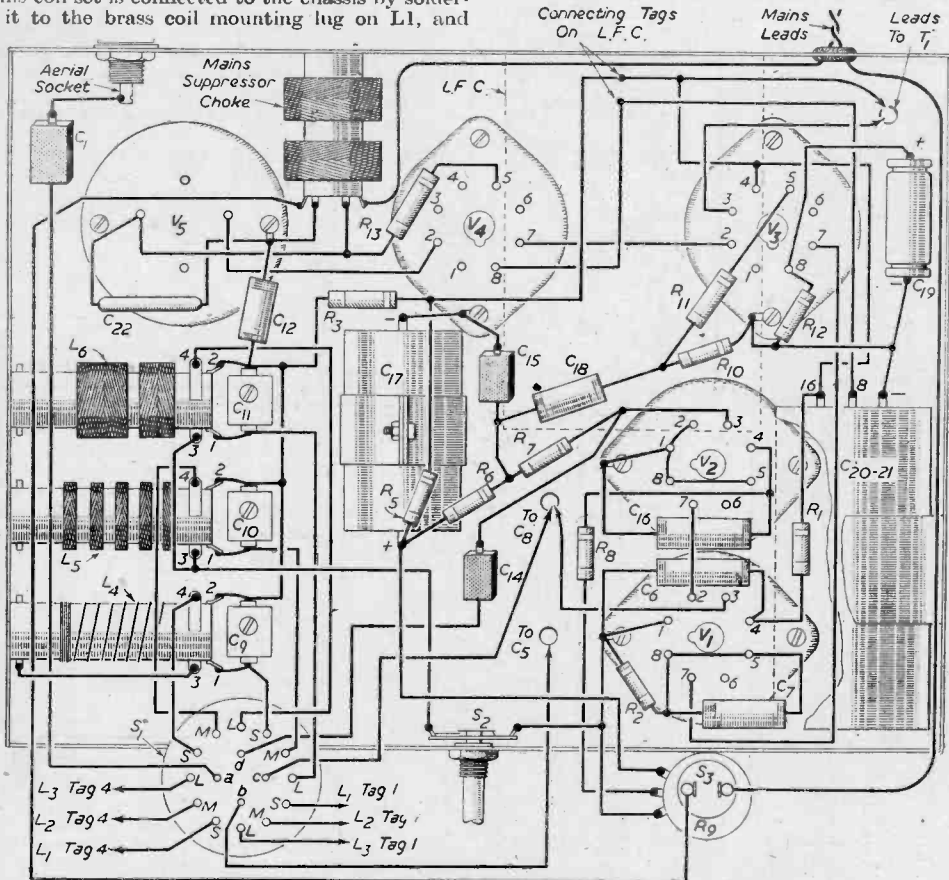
Underside of chassis. Leads are shown straight and angular for clarity. Note earth connections to soldering tags on valveholders.
